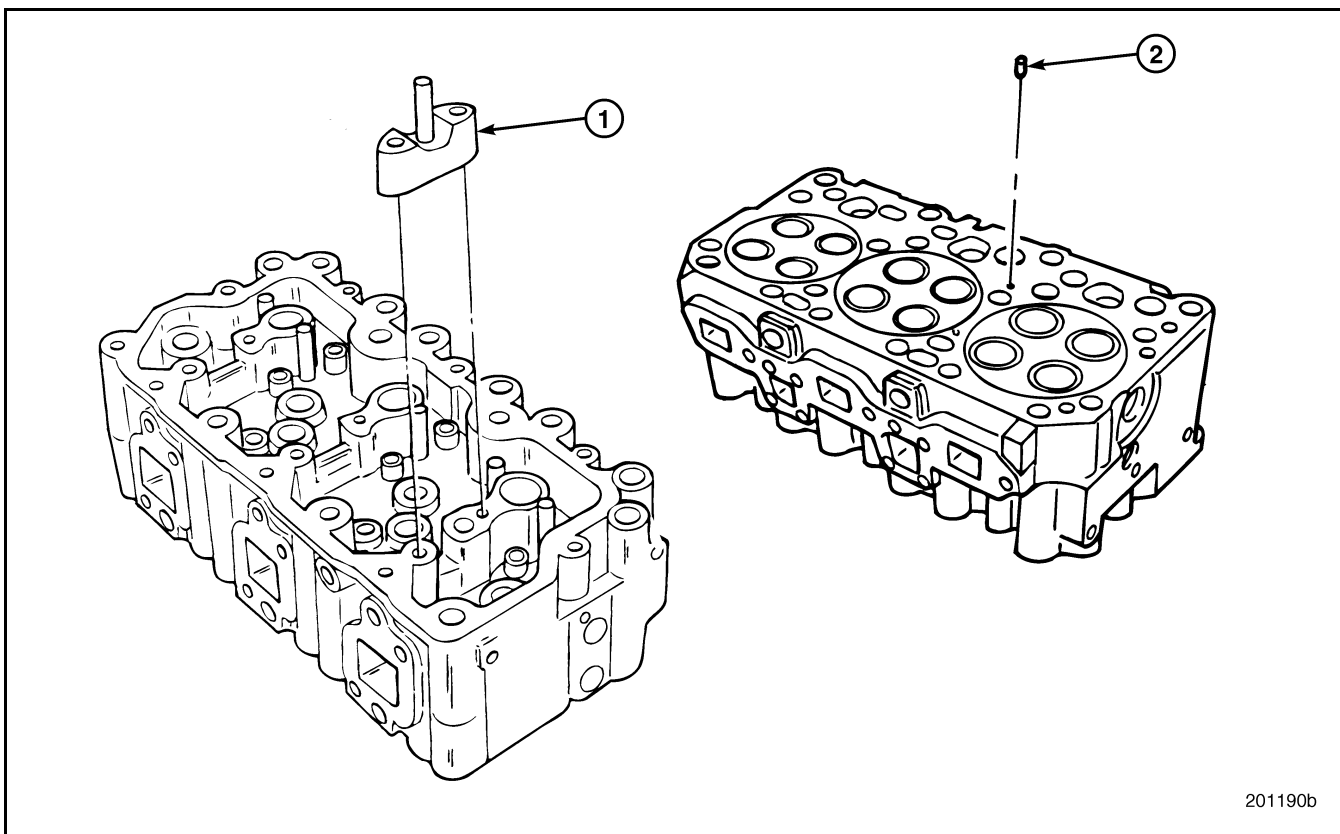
Cylinder Head Oil Passage Leak Check (Out of Chassis)
